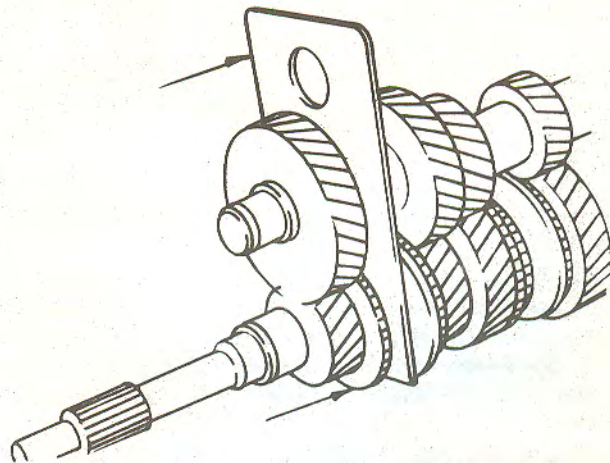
Fitting the retaining plate (49 0839 445) between the 4th speed synchroniser ring and the operating sleeve of the mainshaft.
